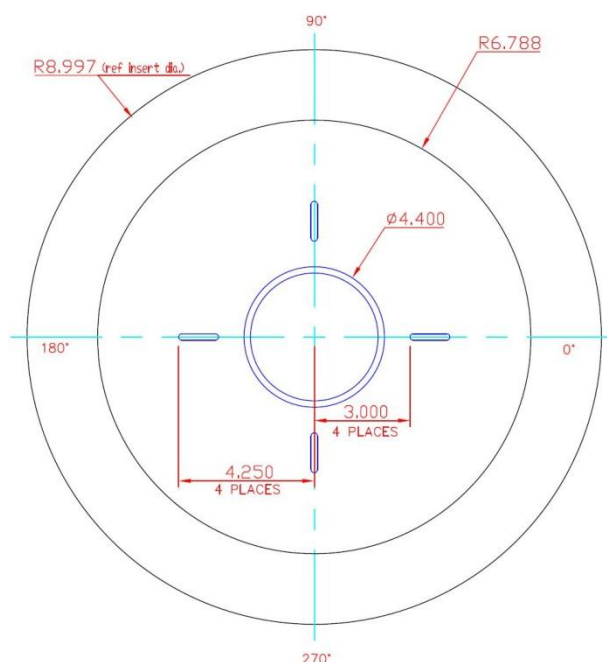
Engineering drawing, indicating positions of contact lens markings.
